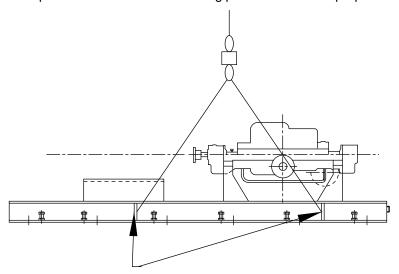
Example of the proper lifting method for baseplate-mounted units without a driver
